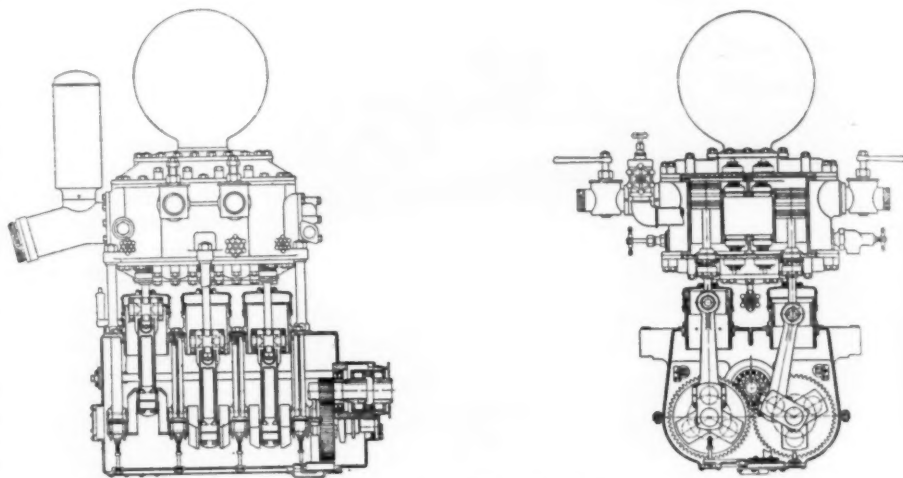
SECTIONAL VIEWS OF AHRENS-FOX SIX-CYLINDER PISTON PUMP
